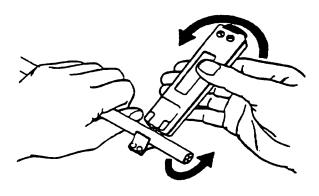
Swivel Blade Stripper Tool, CIrcular Cut
